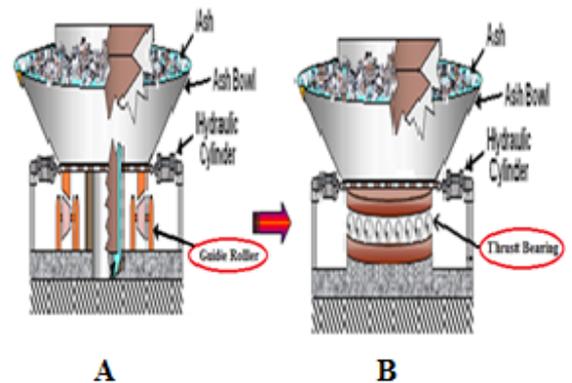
Ash bowl arrangement with (A) Guide roller and (B) Thrust bearing
